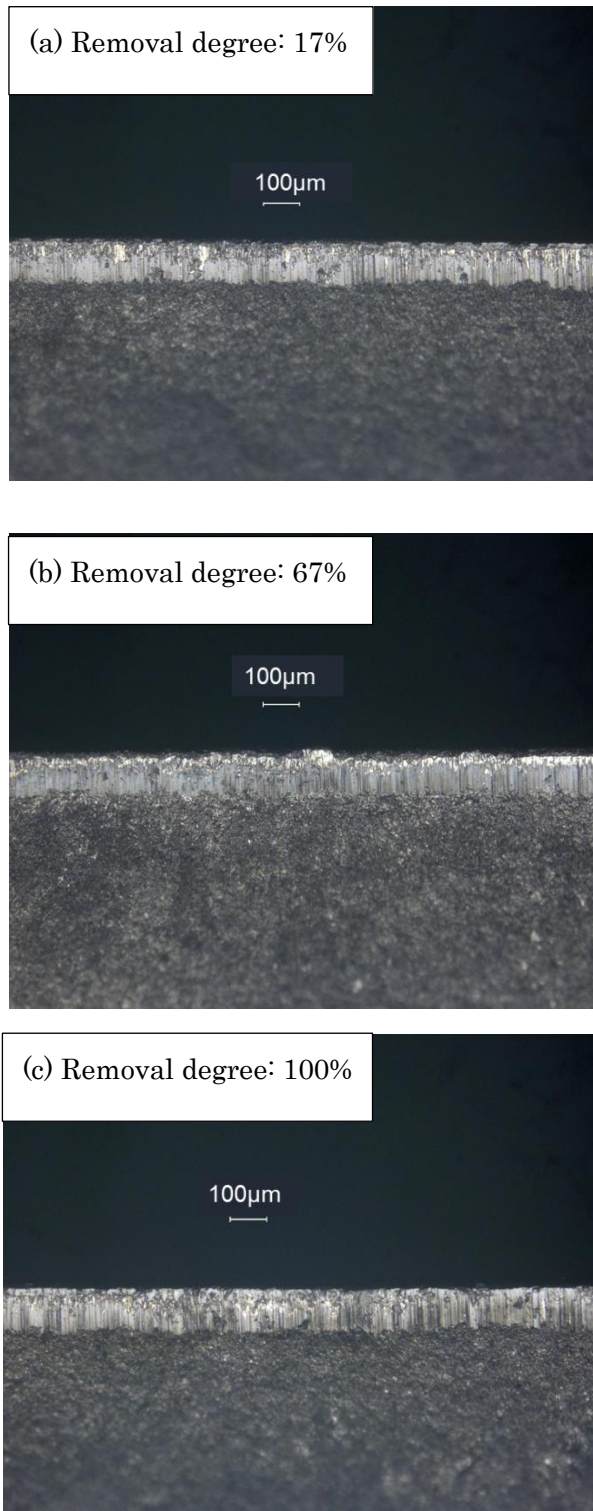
Images of flank wear of tilt taper end mill at different removal degree.
